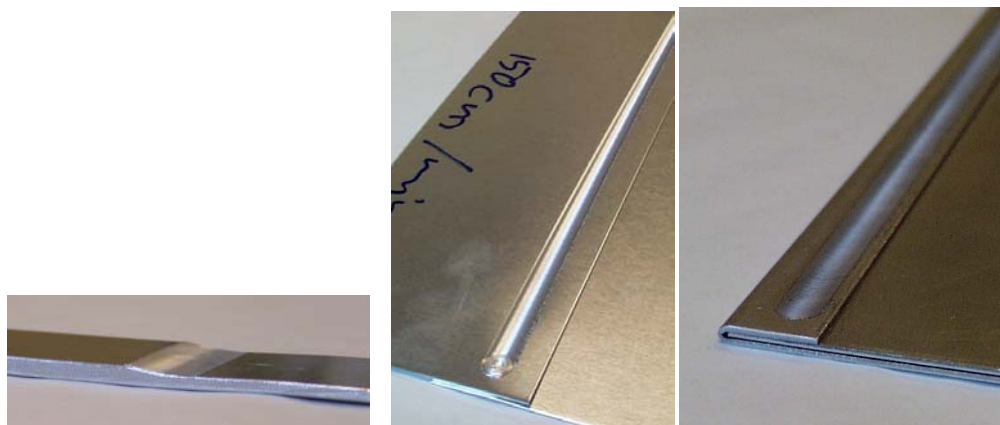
Possible applications in a car for friction stir welding: mixed joint between two thickness (1+2 mm), overlap joint on 1 mm thickness and folded seal weld. ©ESAB
